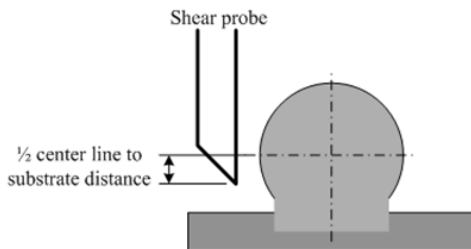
Shear probe to BGA solder ball alignment diagram⁽¹¹⁾
